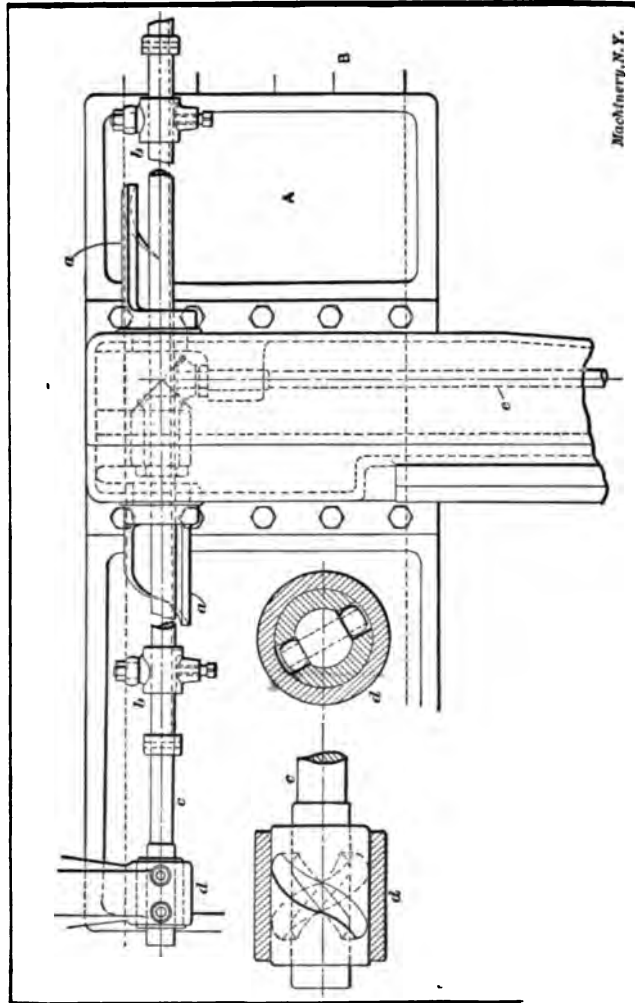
Combined Reversing and Feeding Mechanism for Side Planer
